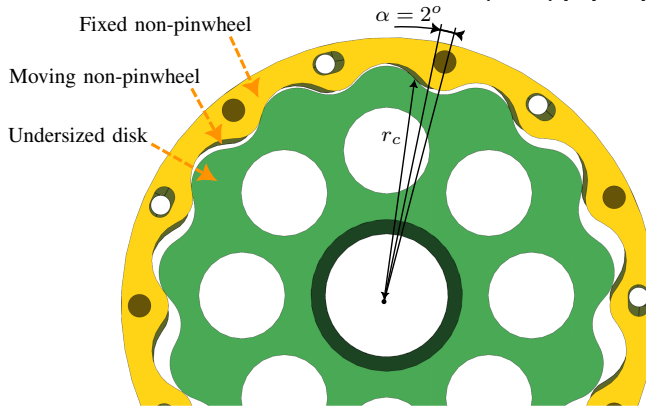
Isometric top view of split pinwheel design showing meshing with an undersized disk.
